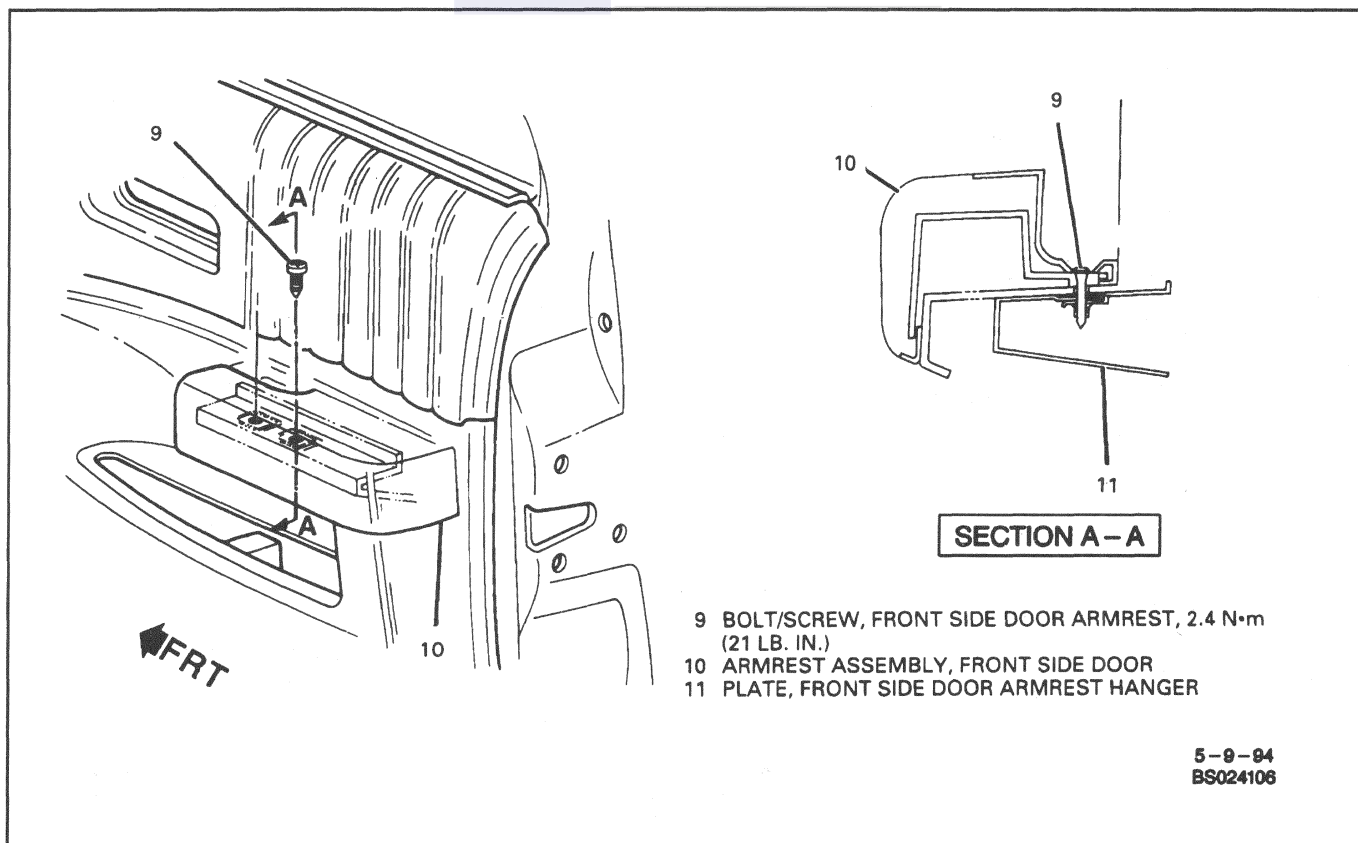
Removing Front Side Door Armrest-(Chevrolet)
